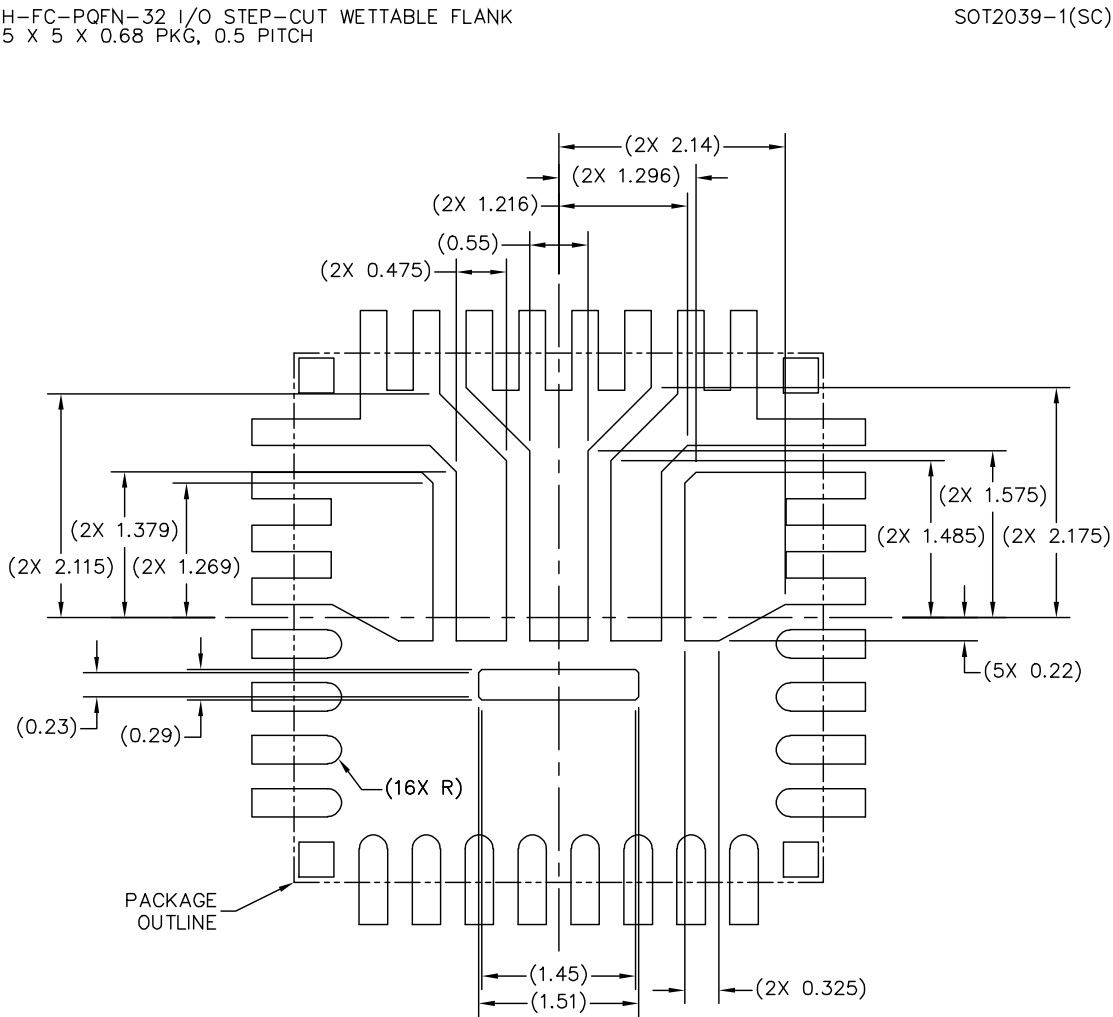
Reflow soldering footprint part4 for HWQFN32 (SOT2039-1(SC))
